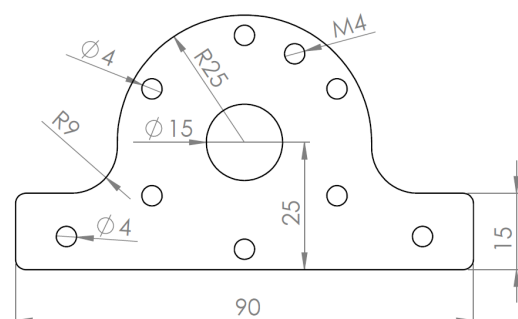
Drawing of the magnet support layer (6 mm acrylic sheet).
